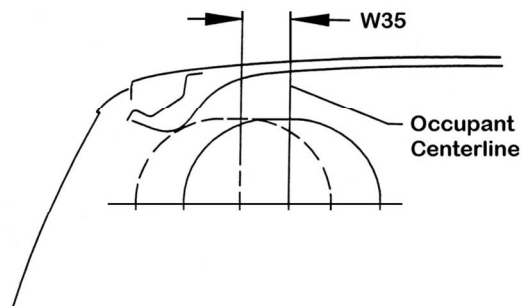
C—REAR VIEW HEAD CLEARANCE LATERAL
